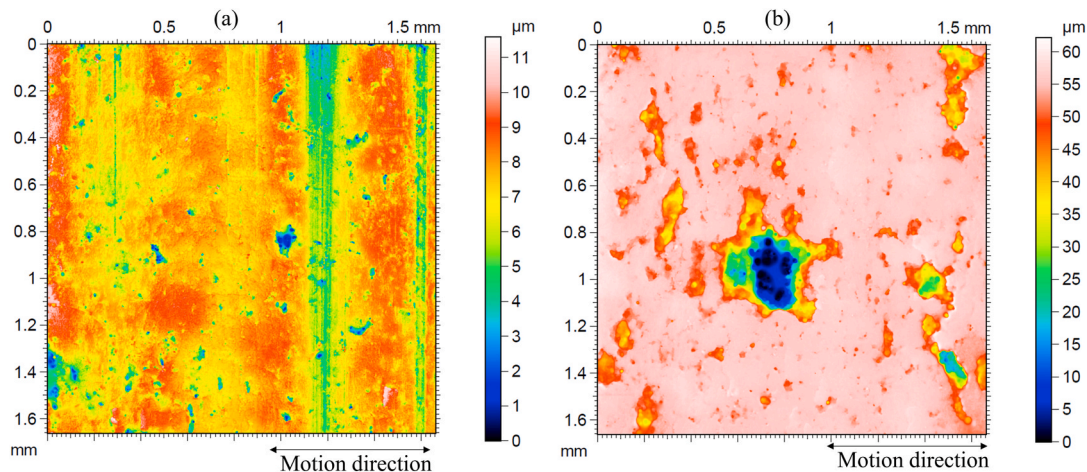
Top view images of the gear surfaces with the lowest (a) and the highest (b) severity of damage from the pitting failure mode.
